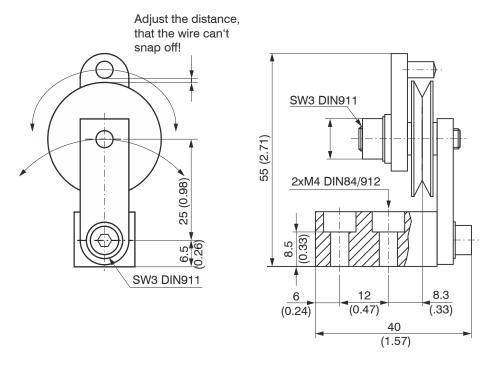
Guide pulley TR1 with mounting socket, dimensions in mm (inches), not to scale
